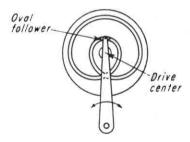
This sliding cam in a remote control can shift gears in a position that is otherwise inaccessible on most machines.
